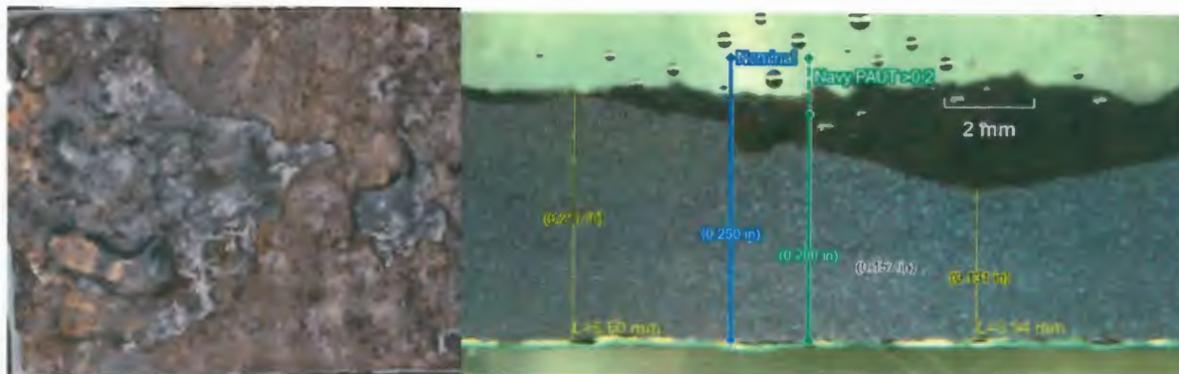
Destructive Testing Cross-section from Sample 3-3.
